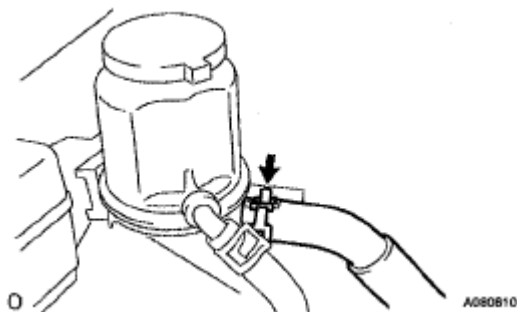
Identifying No. 1 Oil Reservoir Pump Hose
